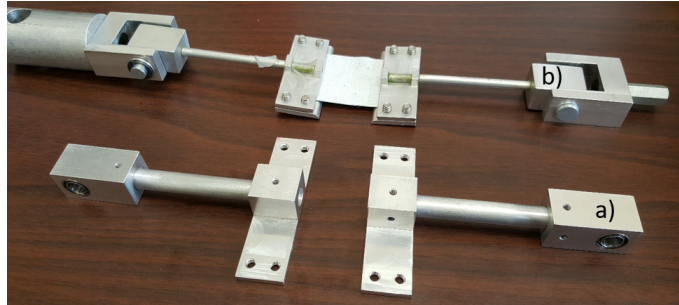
Aluminum CBT fixture a) initial “heavy” fixture and b) modified “light” fixture used in most of the testing
